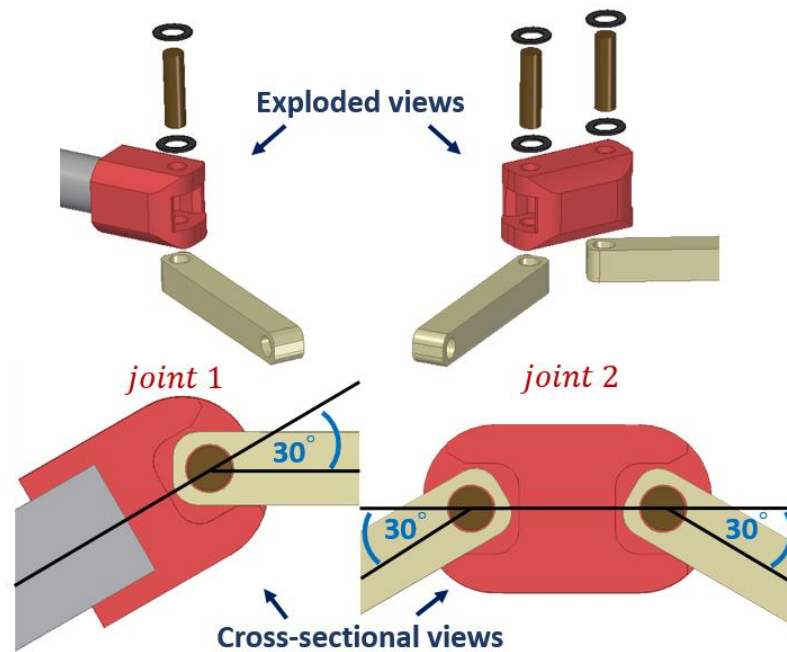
Exploded and cross-sectional views of joint 1 and joint 2, showing the angular joint rotation constraint inherently built in the joint design.
